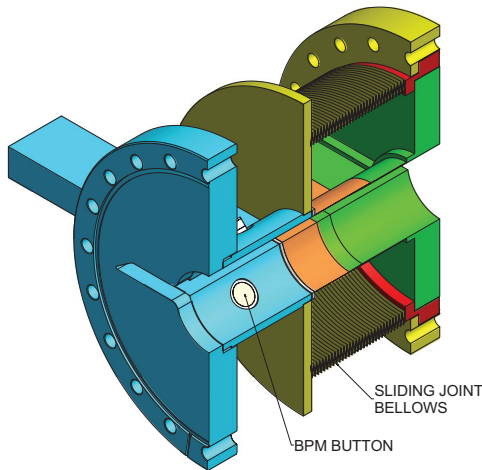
ILC DR BPM and Sliding Joint Assembly.
